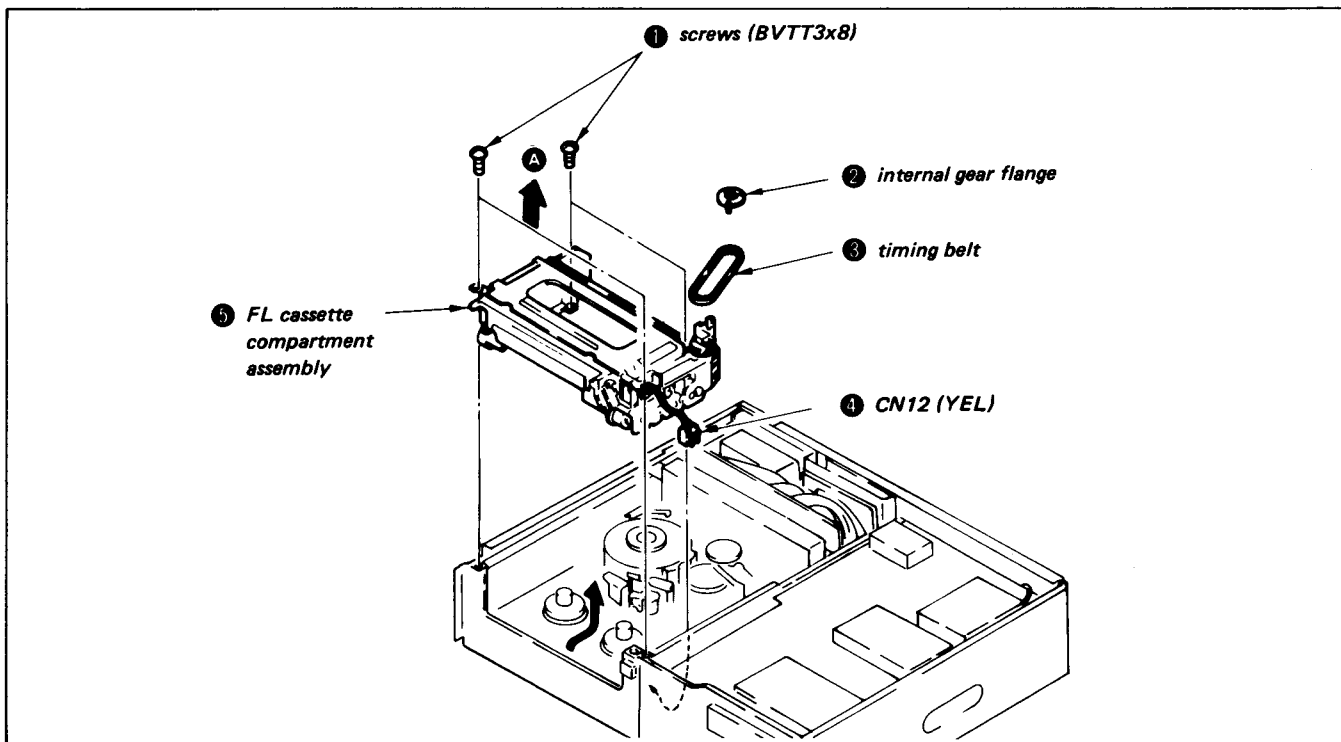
Removal of the FL Cassette Compartment Assembly
